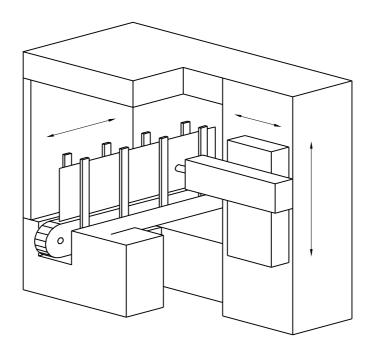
Example 8 of a portal frame boring machine (moving tables, fixed portal, moving heads)
